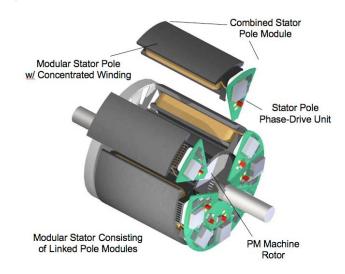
Illustration of integrated modular motor drive (IMMD) concept including modular stator assembly.
